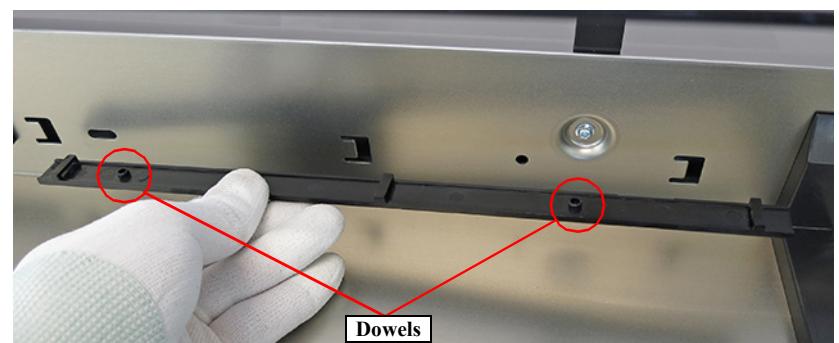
Removing the ROLL PAPER RAIL GUIDE
